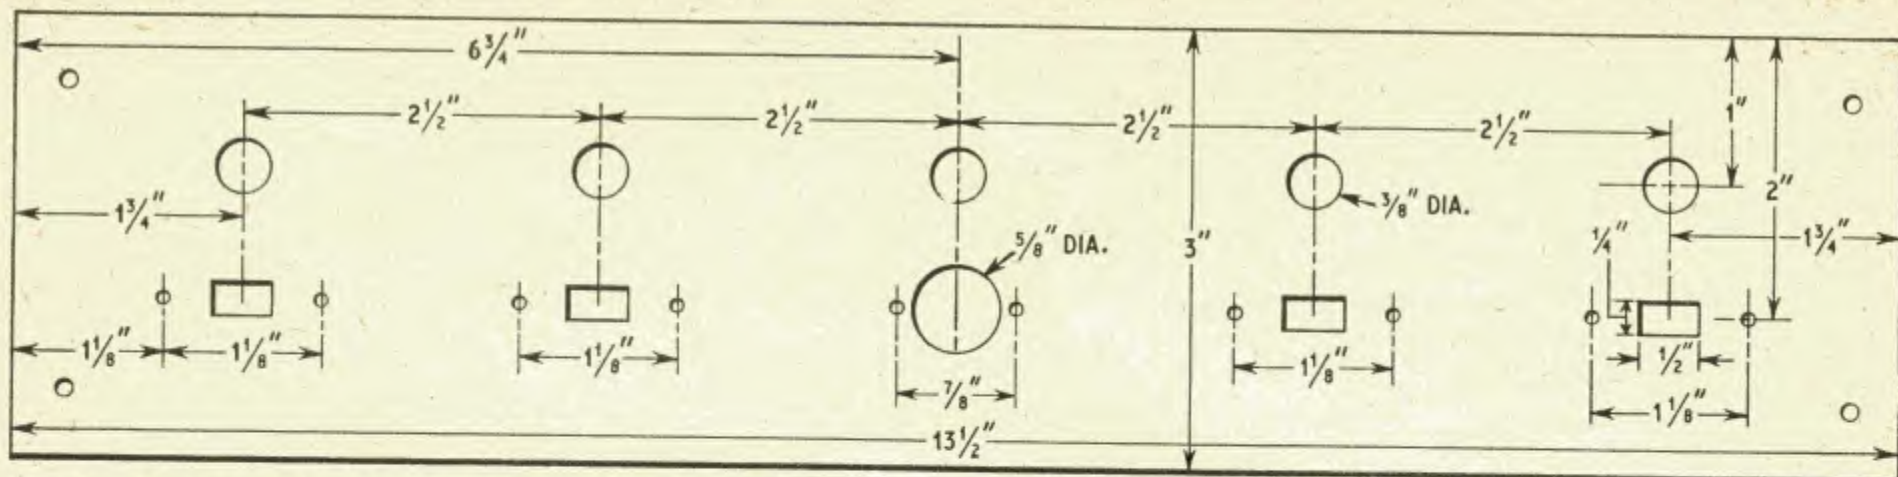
Drilling details for the stereo front panel which can be made from thin plywood, hardboard or aluminium
